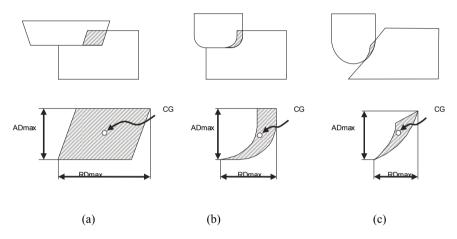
Examples of the cross-section with different milling cutters. a. Face mill; b. bullnose end mill; c. ball-nose end mill
